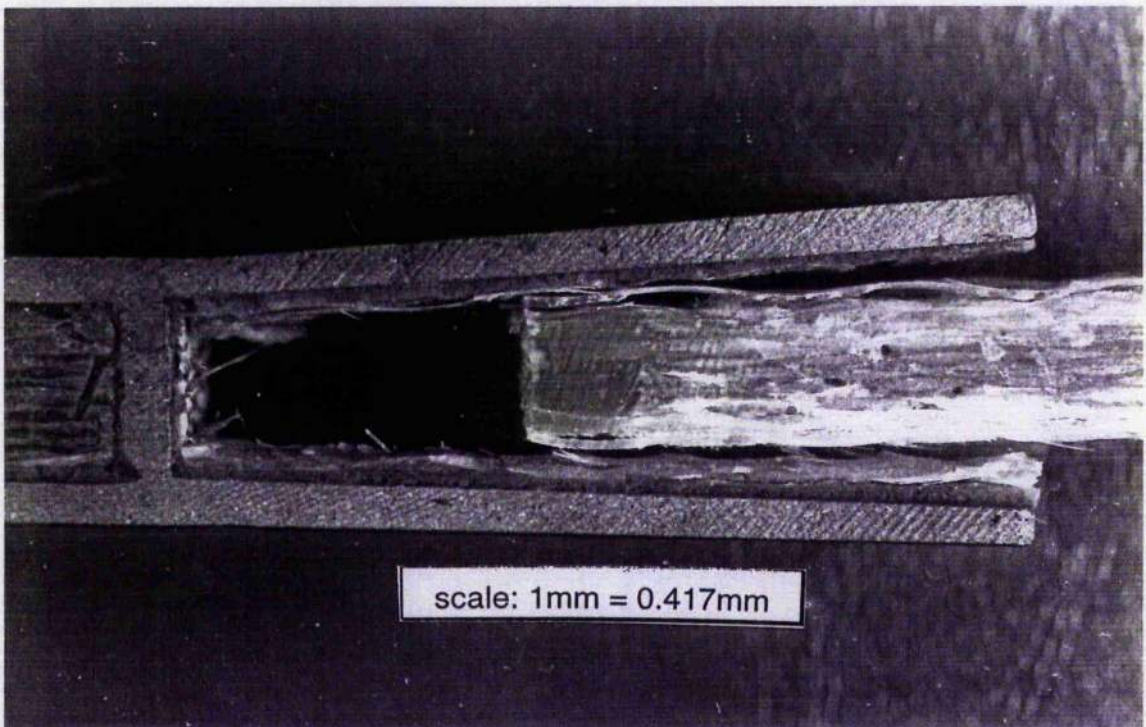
H - section steel strap joint demonstrating an interply delamination failure
